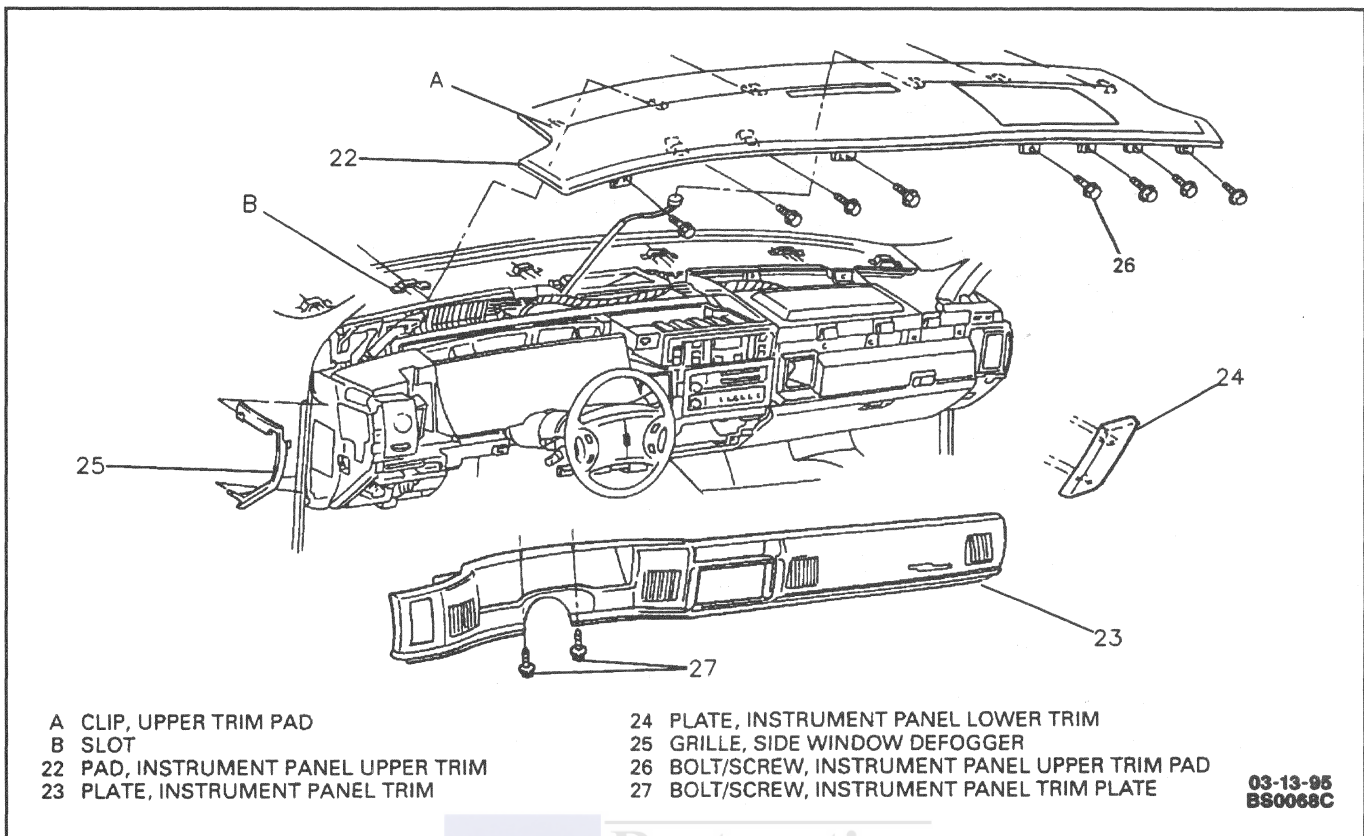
Upper Trim Pad, Lower and Right-Hand Trim Plates - (Buick)
